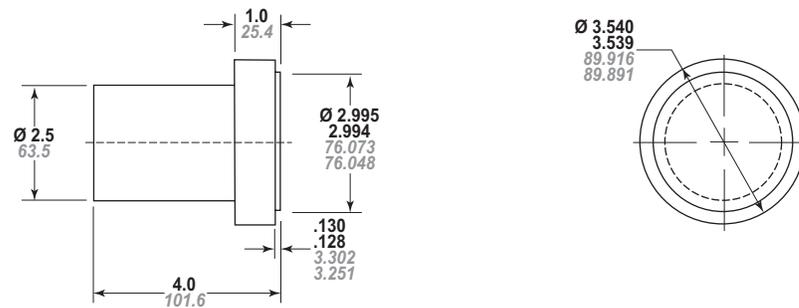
Model 4500/4600 Lip Seal Pressing Tool
